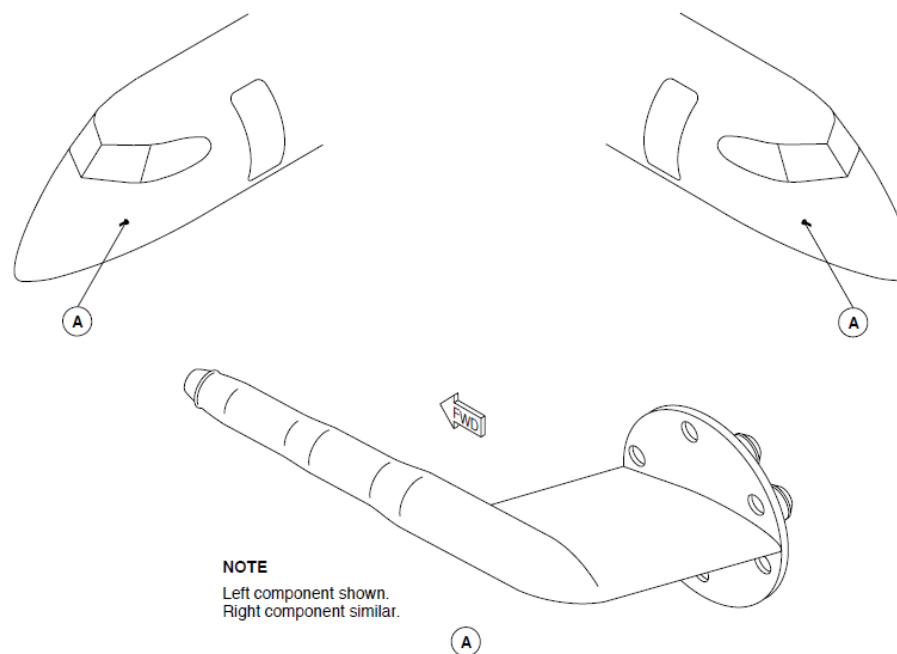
6 PITOT-STATIC PROBES LOCATOR
